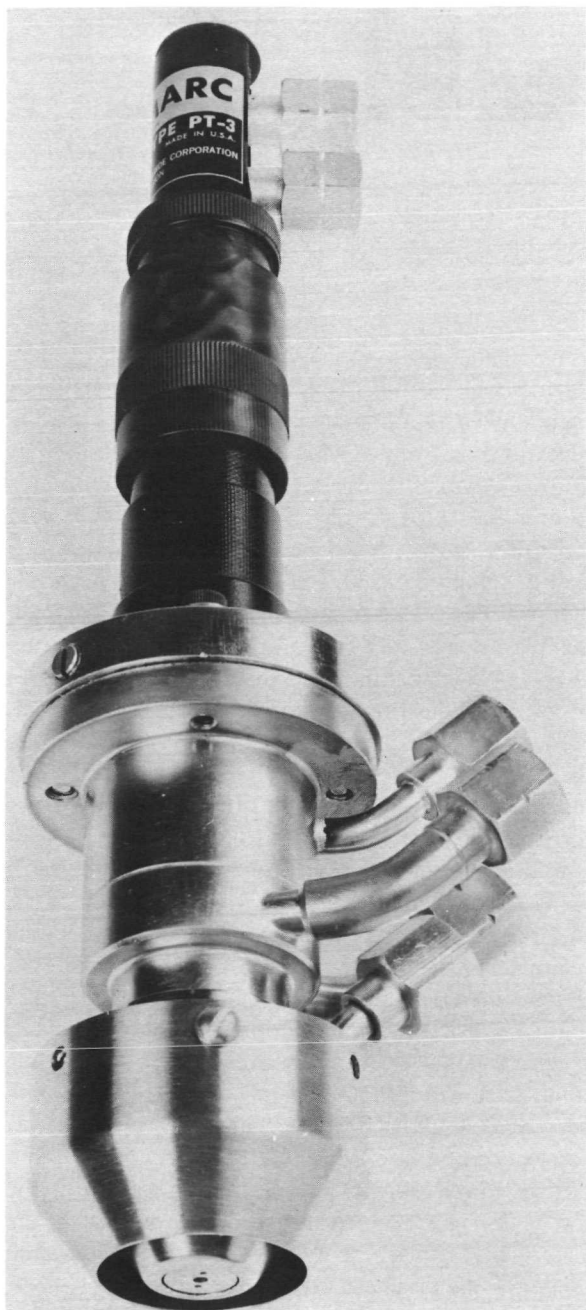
Mechanized plasma-arc-welding torch.
